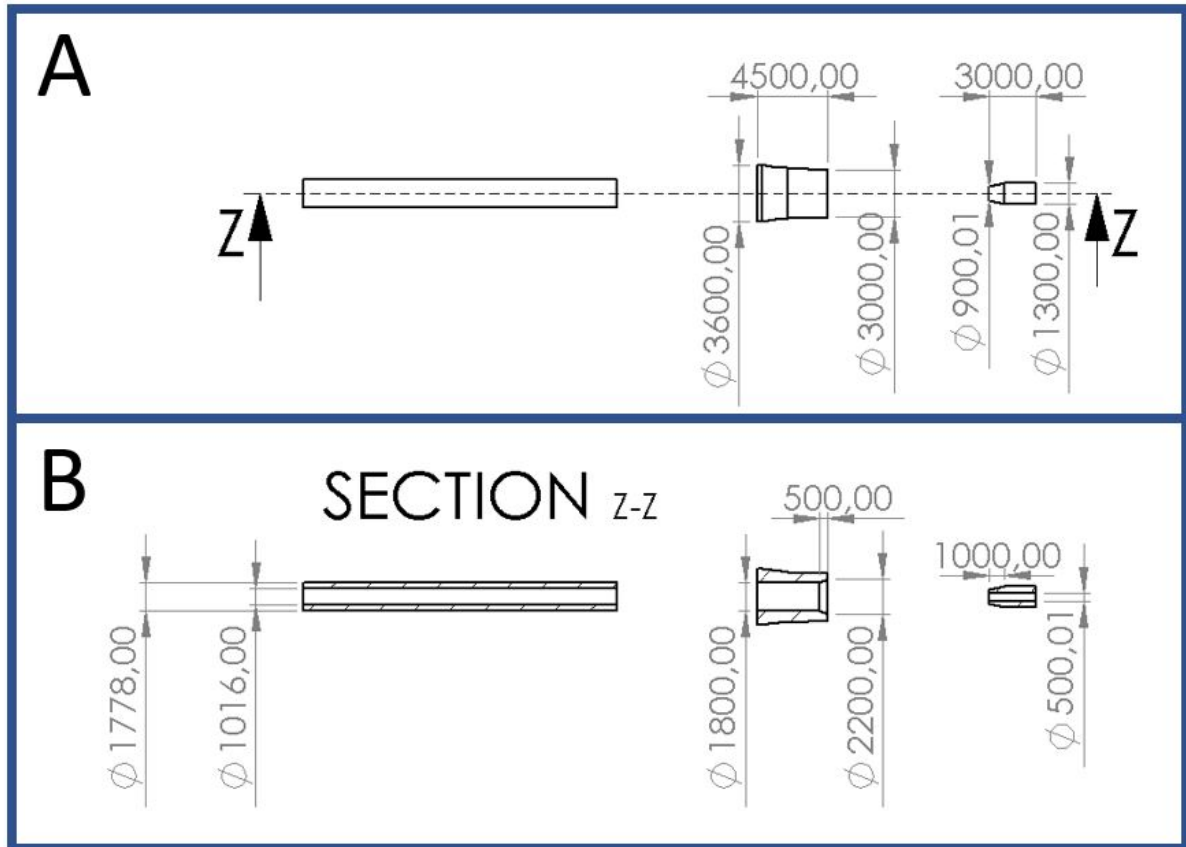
Drawing of the microfluidic connector principle of the microfluidic connector. Dimensions in μm , A) Top view, B) Section view Z-Z
